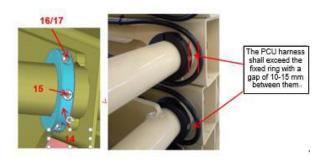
Installation of fourth layer pipeline 15. Fastening ring 16. Screw 17. Fastening ring 18. Screw
